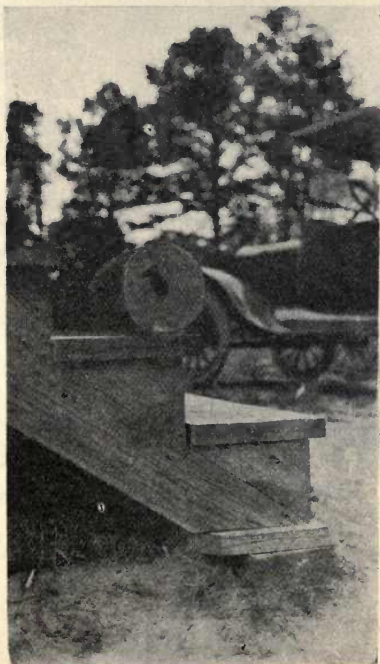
Plate XIV. A Steel Choke Worn by the Passage of Sand with Oil.
